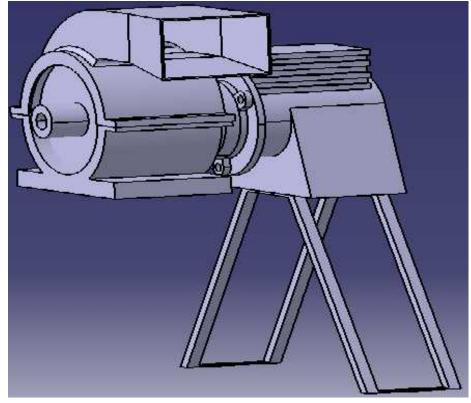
figure shows how the Centrifugal fans By CAD design
